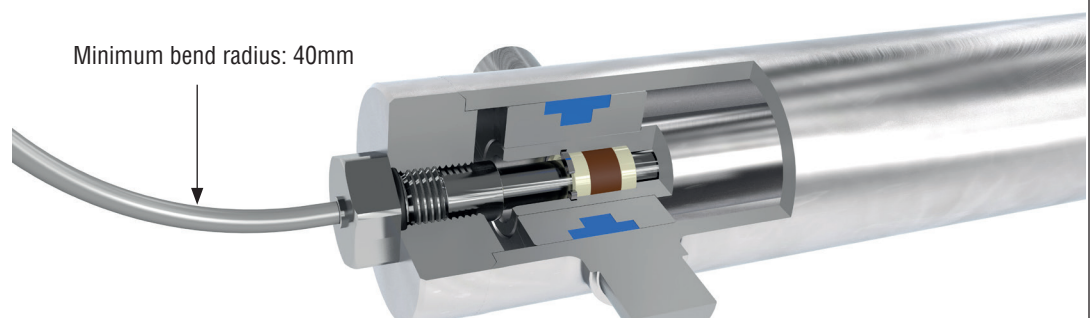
Temposonics® MH-Series SLIM threaded mounting
